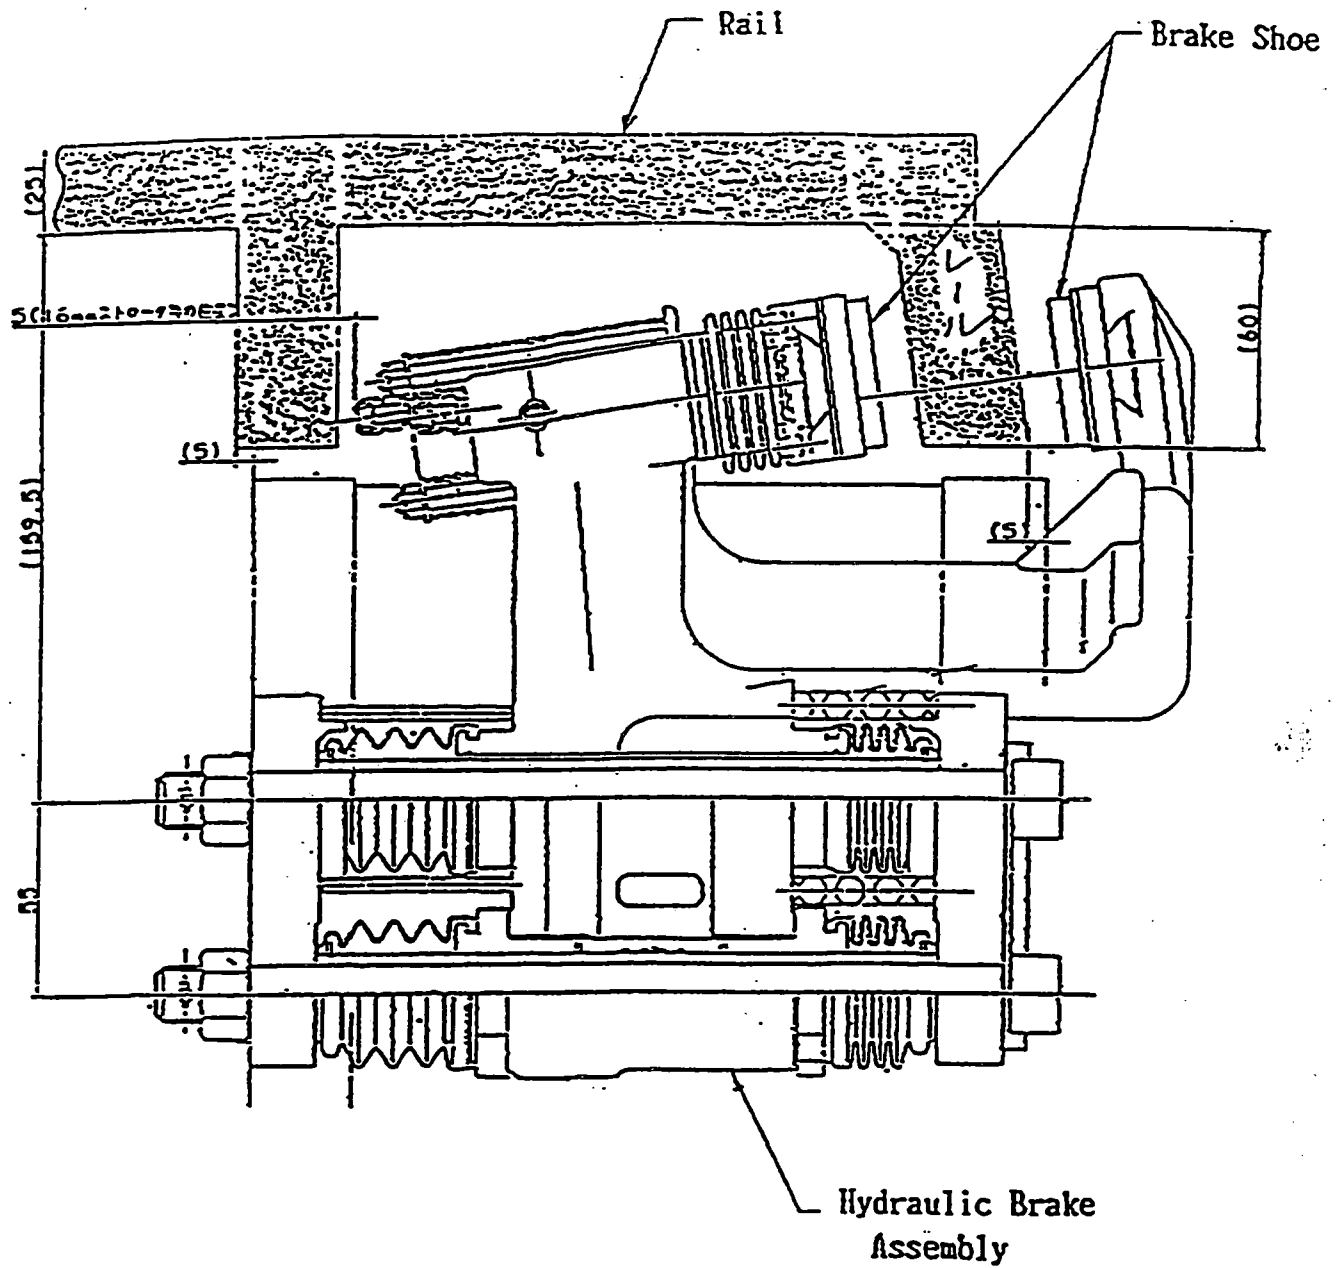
HSST Hydraulic Brake Caliper Assembly
